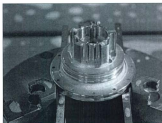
Completed part after milling the wiring clearance slots and drilling the threaded mounting holes for the hub taper angle adaptor.
